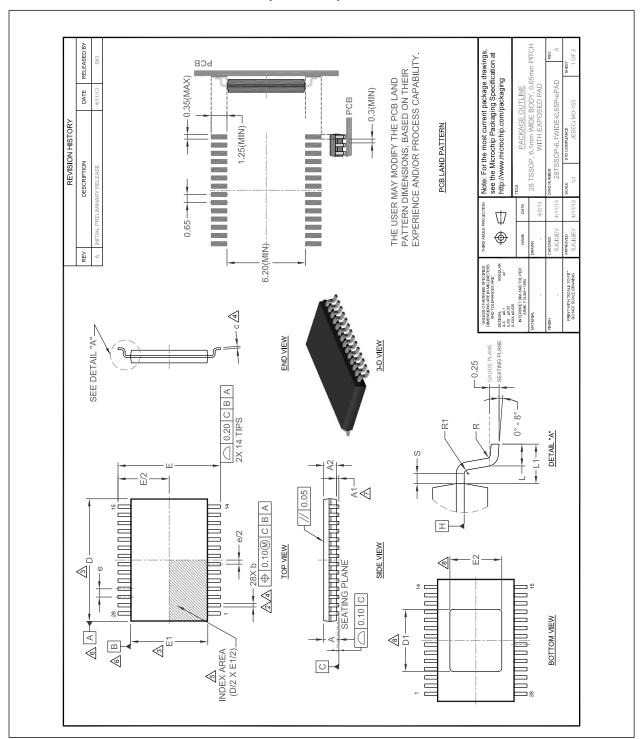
28-TSSOP PACKAGE (DIMENSIONS)
